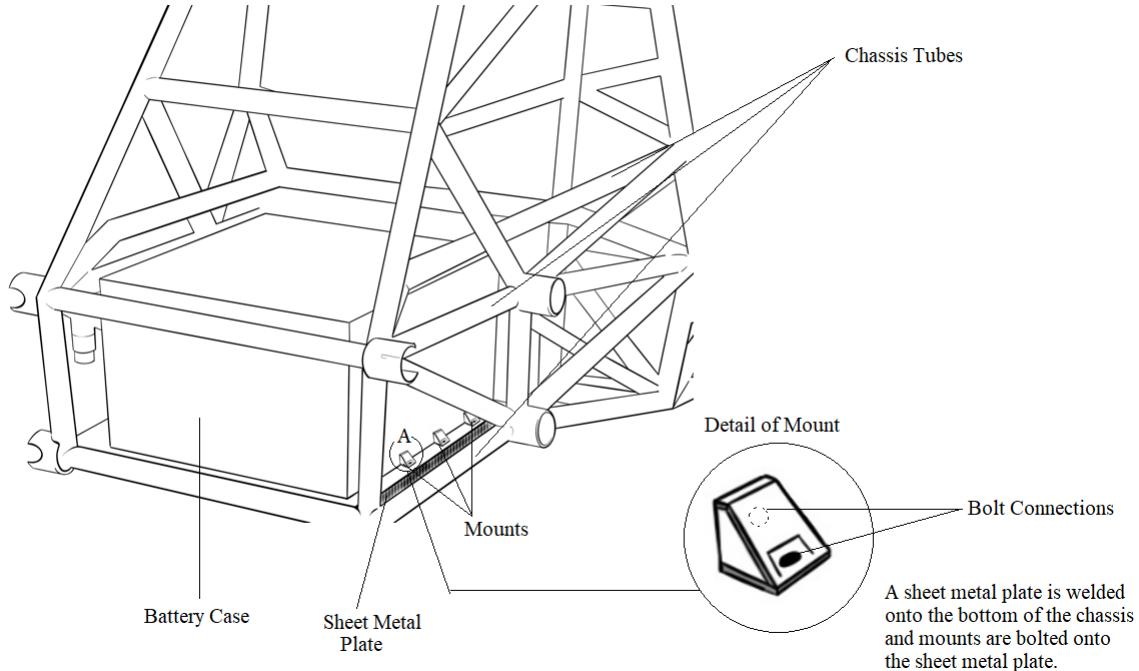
Isometric view of a battery mounted onto a sheet metal plate [18]
